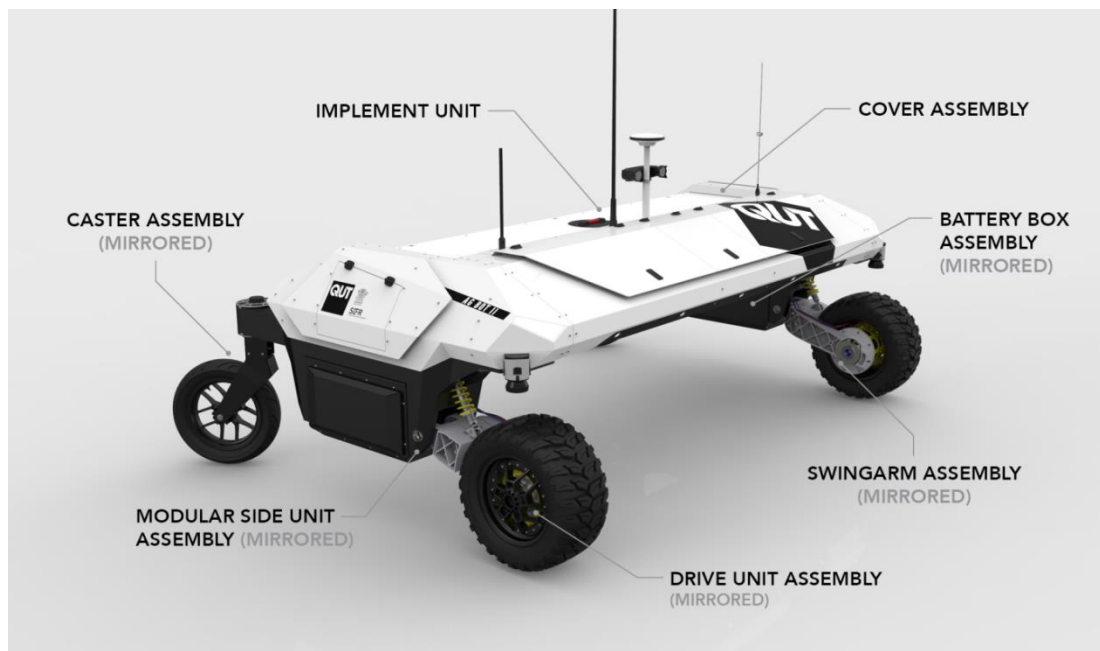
A complete vehicle render showing the major vehicle assemblies in the prototype.
